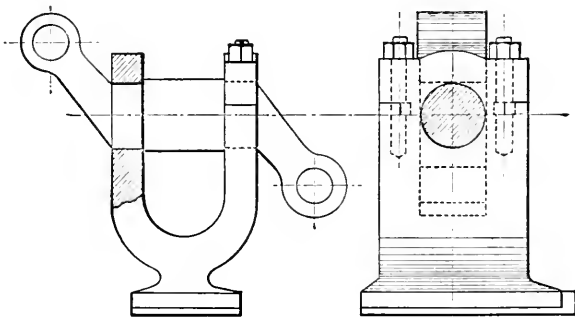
Crosshead and Guide-block for double Piston-rods.
